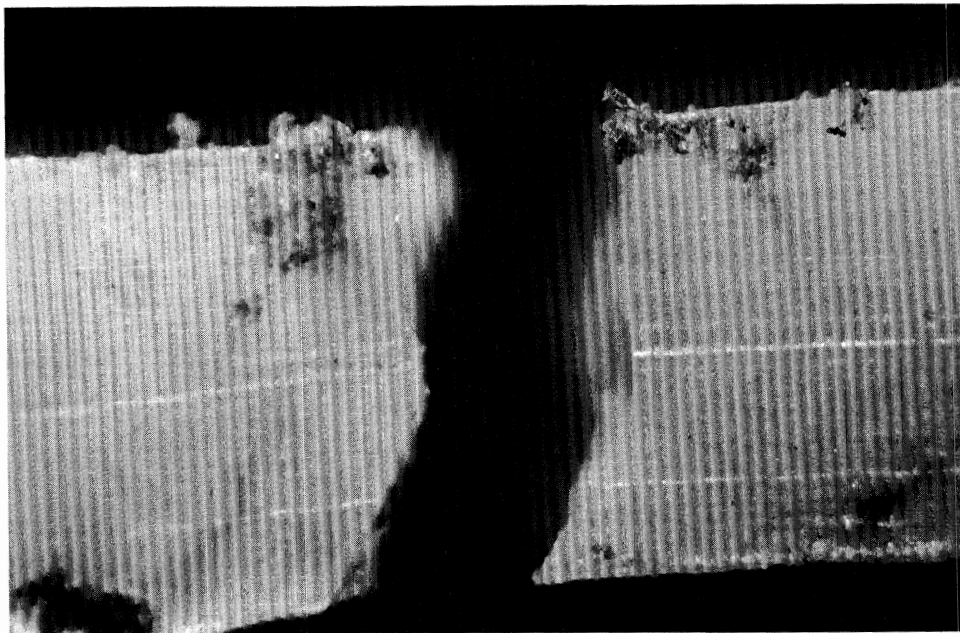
Tensile Specimen VA-17-PL-5 Posterior View After Testing
